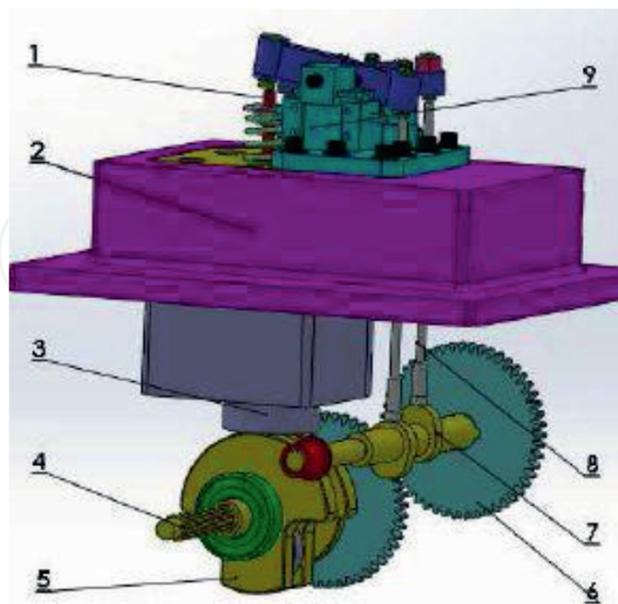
Physical model of APE: 1, balanced valves; 2, cylinder cover; 3, cylinder; 4, crankshaft; 5, crank piston mechanism; 6, timing gears; 7, camshaft; 8, cam follower; 9, tunable rocker mechanism [29].
